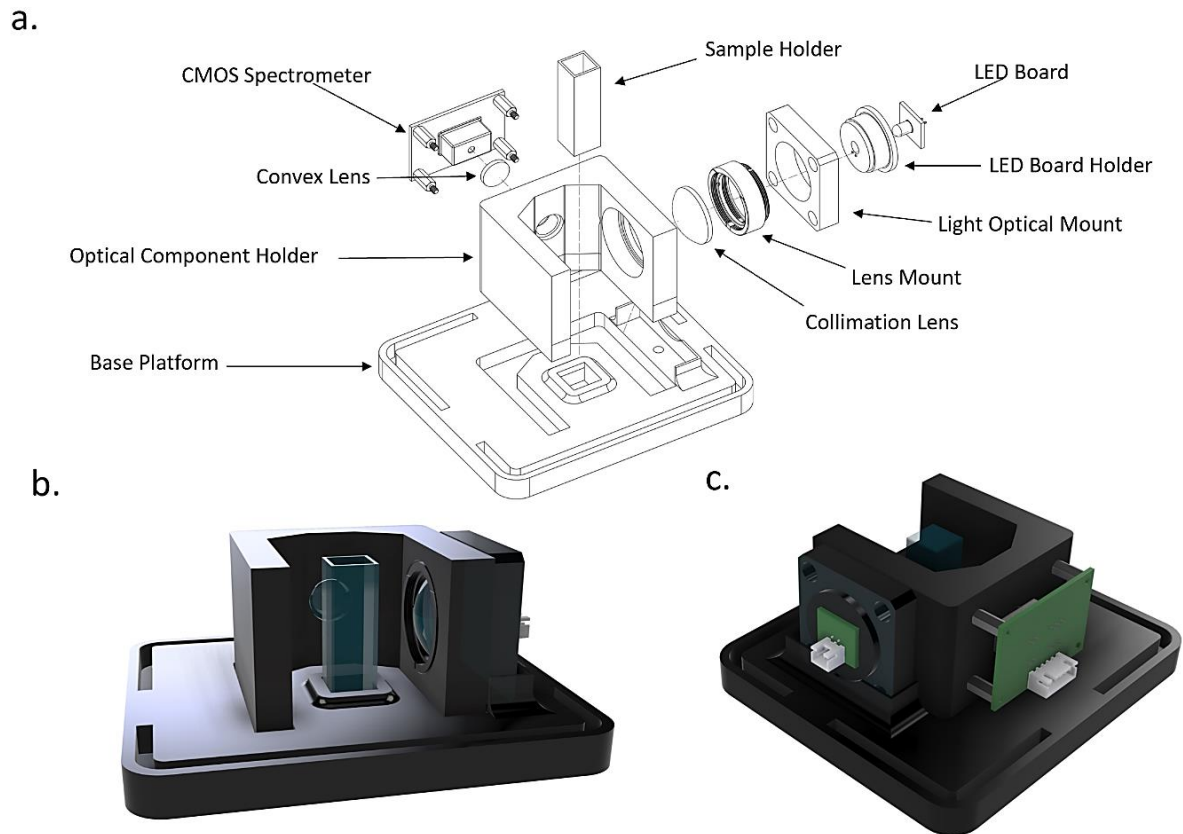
The benchtop optical detection system design for fluorescence and scatter measurements (a) An exploded and labelled view of the benchtop design showing components used and assembly. (b) Shows a 3D render view of the optical detection zone and sample holder. (c) Gives a 3D render view of the mounted detection components.
